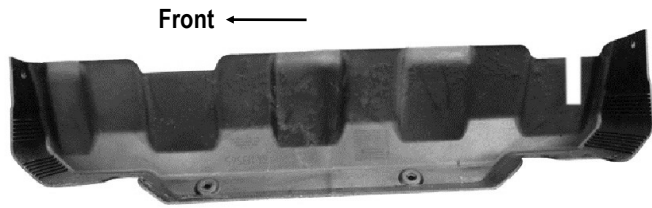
Passenger Side 2nd Bracket Location from Back of Body Panel
